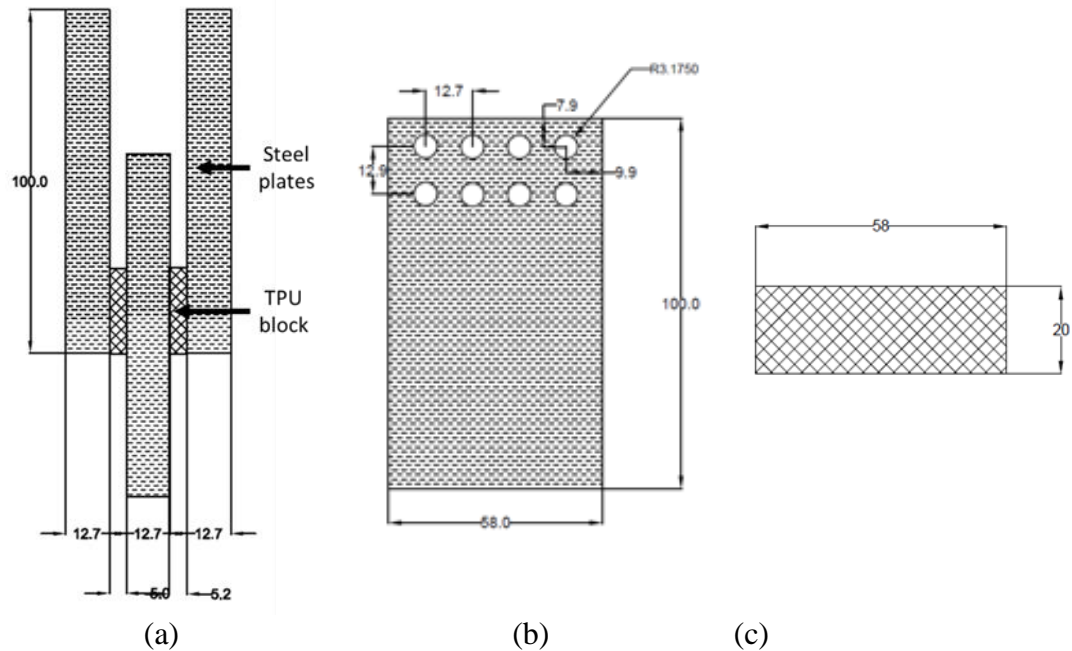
Dimensions of 3D printed VED (a) Geometry of tested VED (b) Steel plate connected to VED (c) TPU block. All dimensions in mm.
